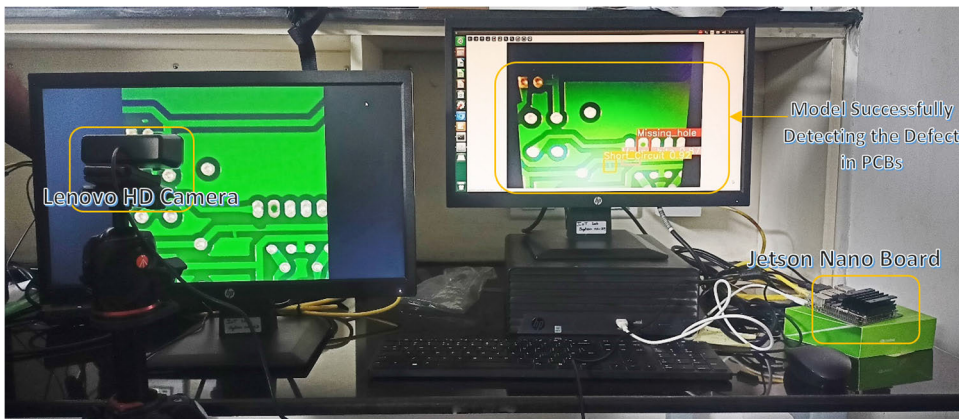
Implementation of real-time PCB defect detection system.
